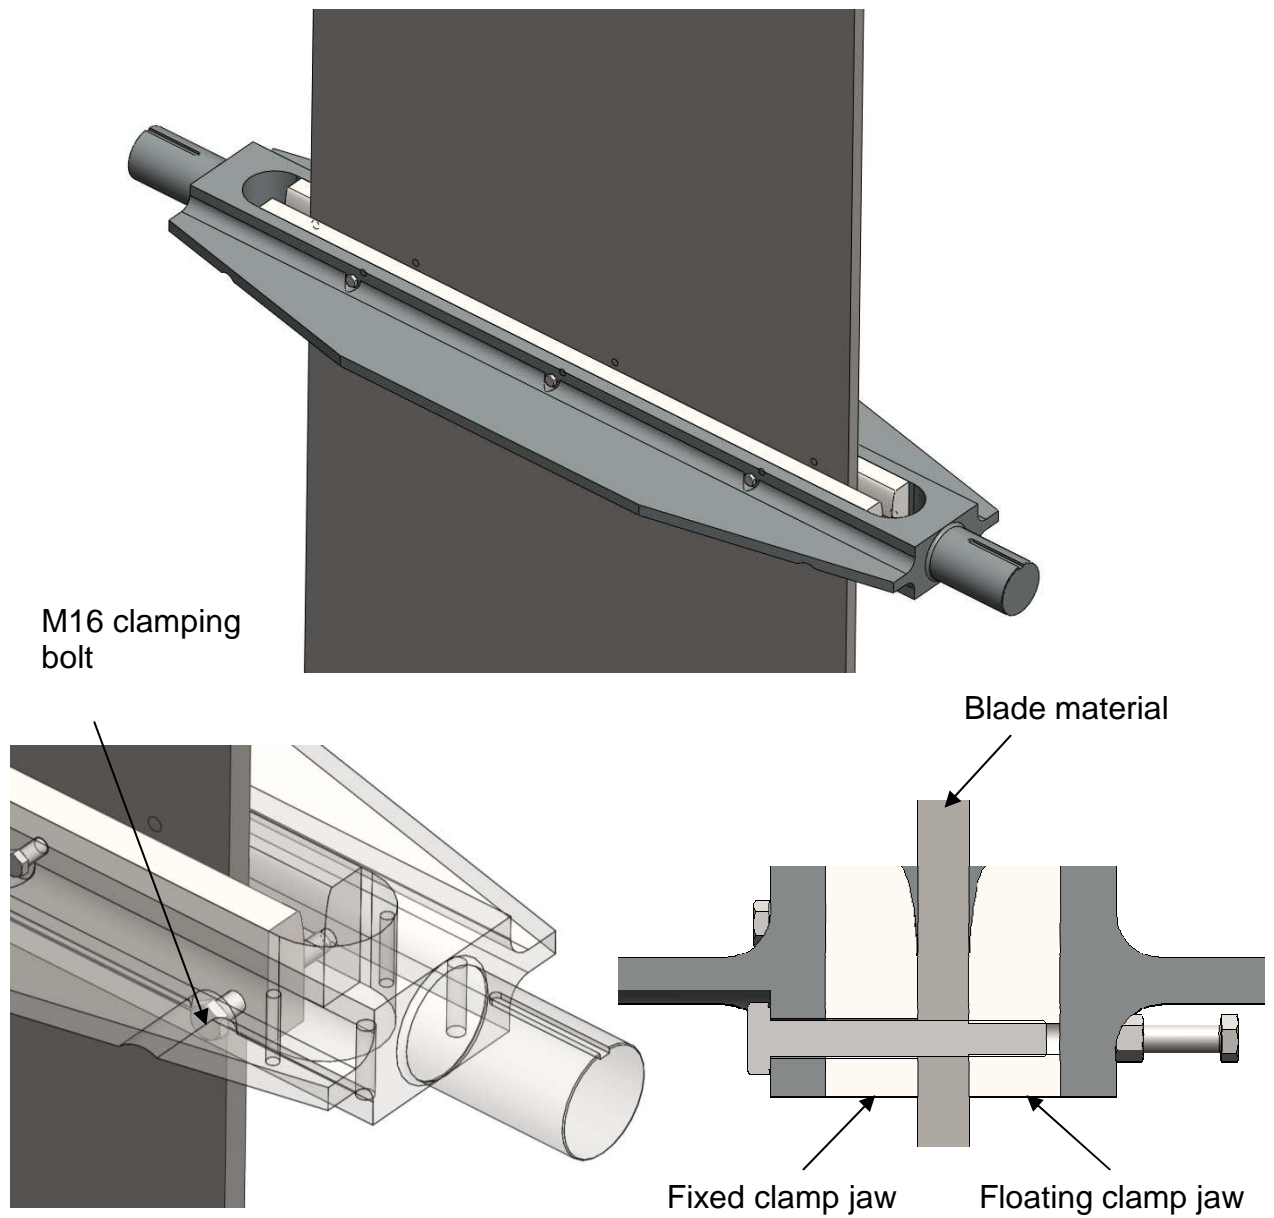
3D CAD image of upper pivot showing the clamping bolts for blade material
